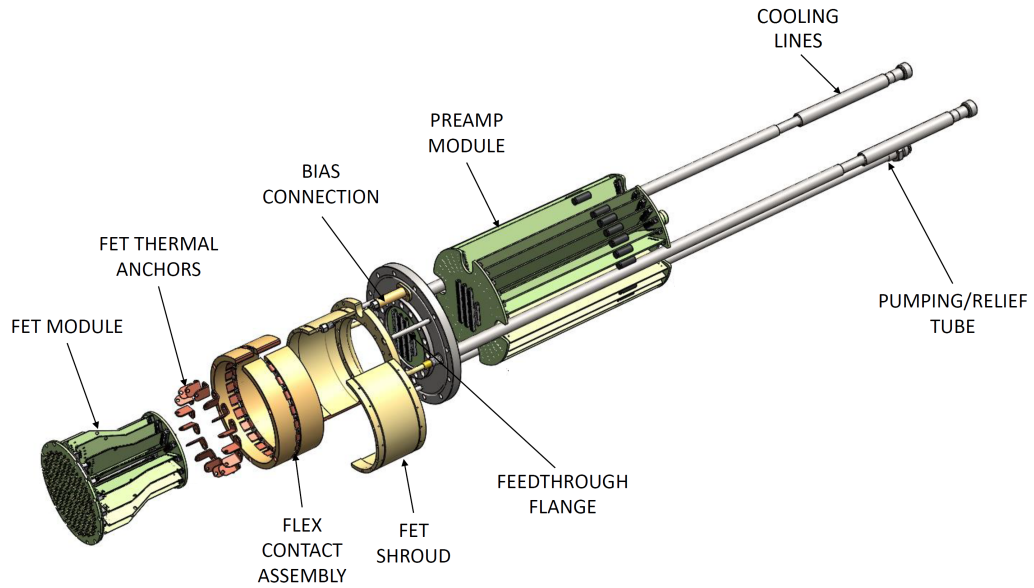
Shown above is an exploded view of a Nab detector mount courtesy of Ref. [60]. The detector (not pictured) mates with the pogo-pin board to the left of the Fet module assembly. The cold helium gas enters the mount's vacuum jacketed cooling lines labeled above. The FET volume (to the left of the Feedthrough Flange) is maintained at vacuum ($\sim 10^{-6}$ Torr). The helium circulates around the gold plated copper FET shroud. The FET thermal anchors tie the shroud and FET cards together. The detector is cooled by direct contact with the FET shroud and Flex Contact Assembly.
